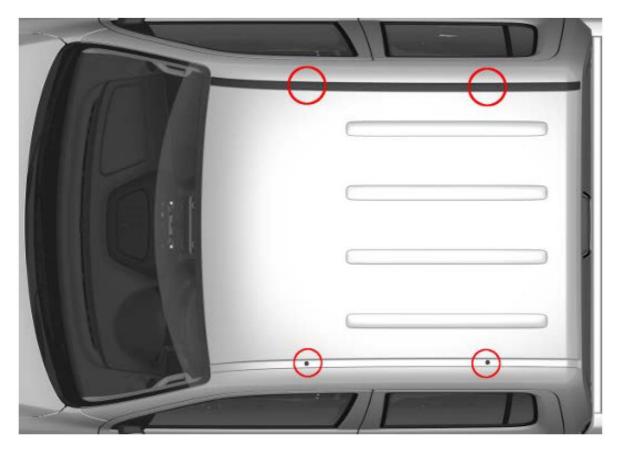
Roof rack bolt attachment points on Amarok DC (marked in red)
